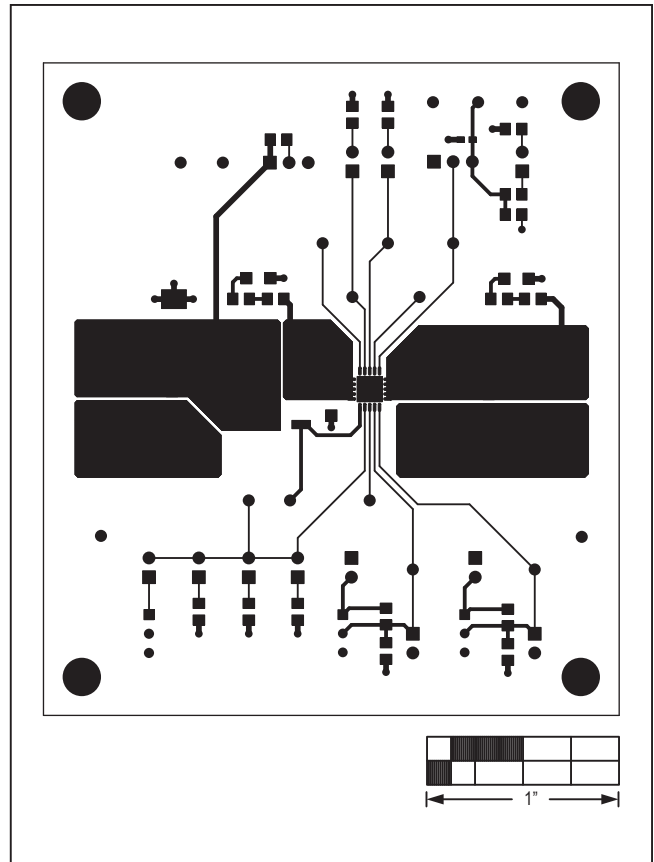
MAX14691 EV Kit PCB Layout—Component Side
